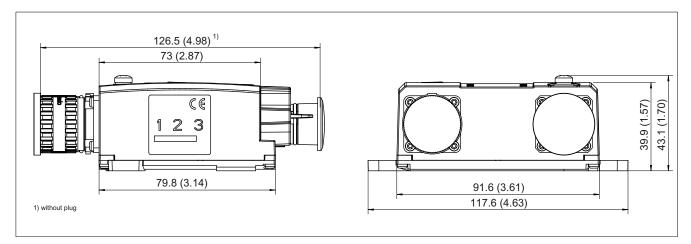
Dimension drawing of Sensor Module External SME120, all data in mm and (inches) order number 6SL3055-0AA00-5JA3
